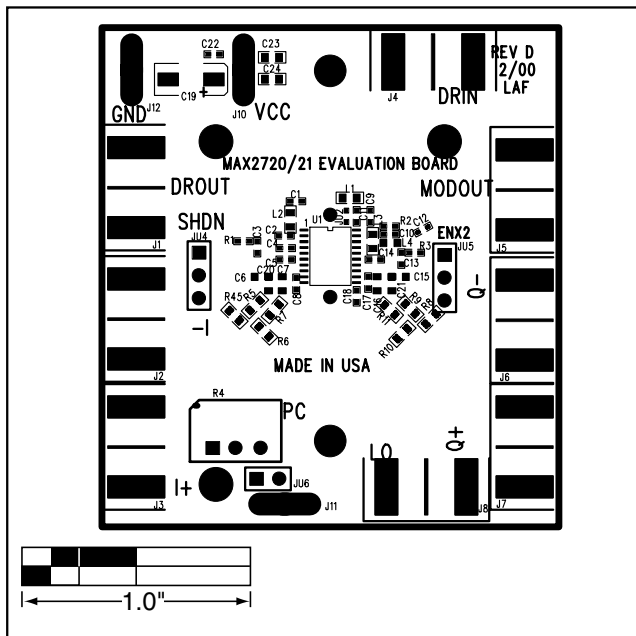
MAX2720/MAX2721 EV Kits PC Board Layout—Component Placement Guide
